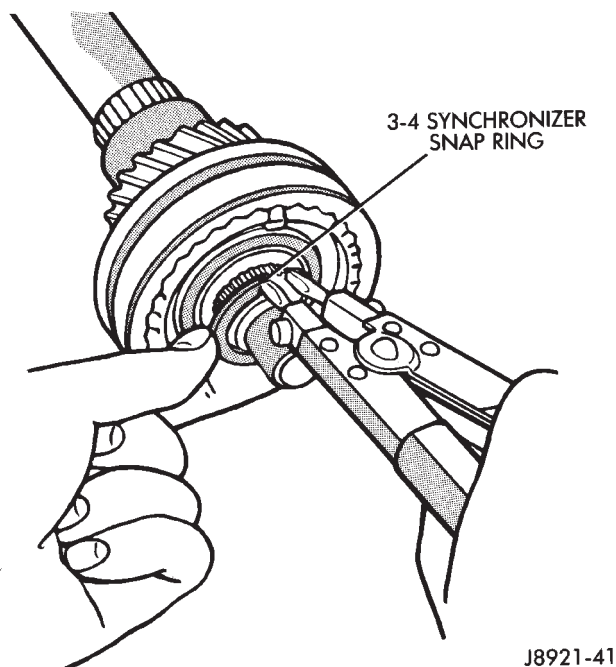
Remove 3-4 Synchronizer Snap Ring
